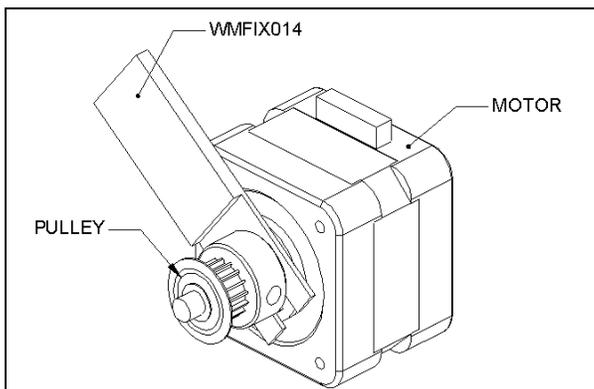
Positioning the Pulley on the Z-Drive Motor
